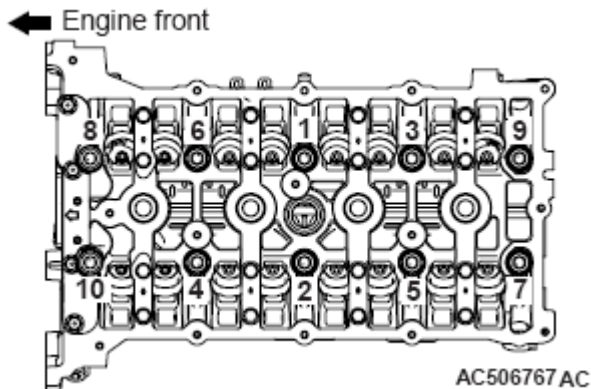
Identifying Tightening Sequence Of Cylinder Head Bolts
